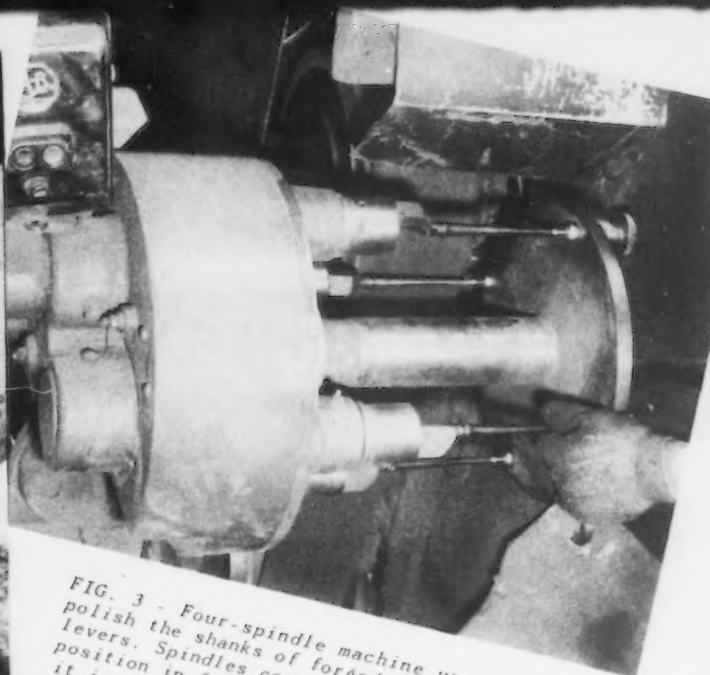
Four-spindle machine used to belt polish the shanks of forged steel gear shift levers. Spindles come to rest at the loading position in front, but rotate the work while it is in contact with the belt.
